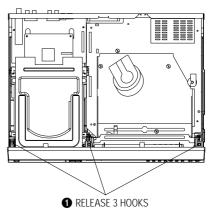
Ass'y Front Panel Removal(Top View)
